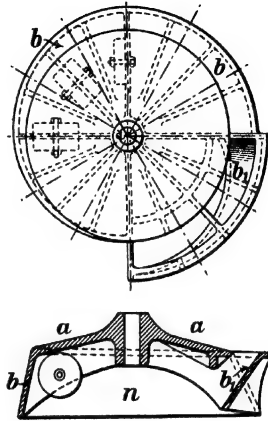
BILDT FUEL DISTRIBUTOR.
